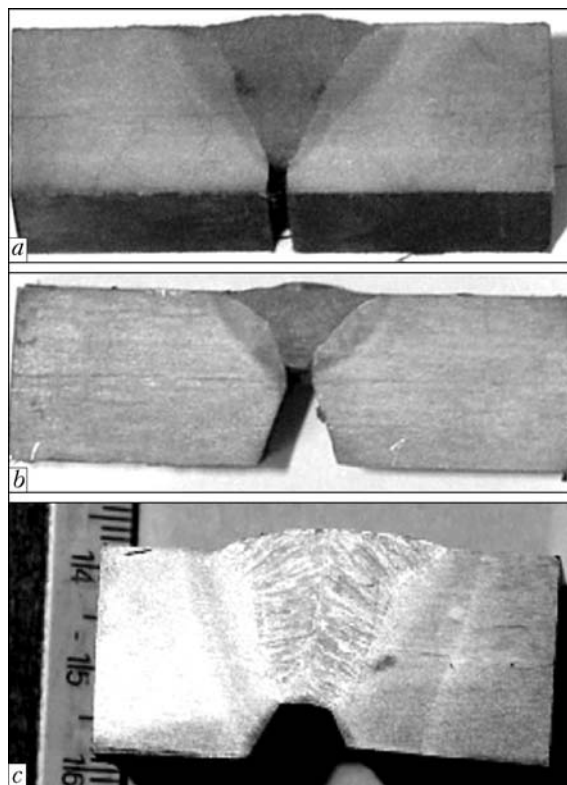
Diagrams of rigid butt joints for investigation of resistance to cold crack formation (technological sample «rigid contour welding»)
